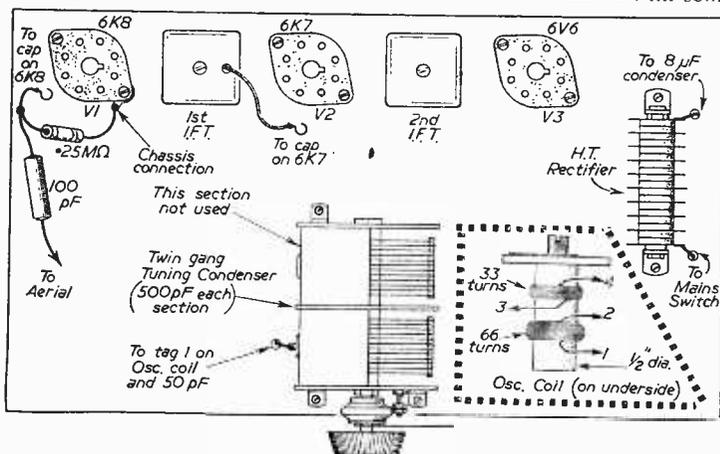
Top of chassis layout and inset (Fig. 2) the oscillator coil.
